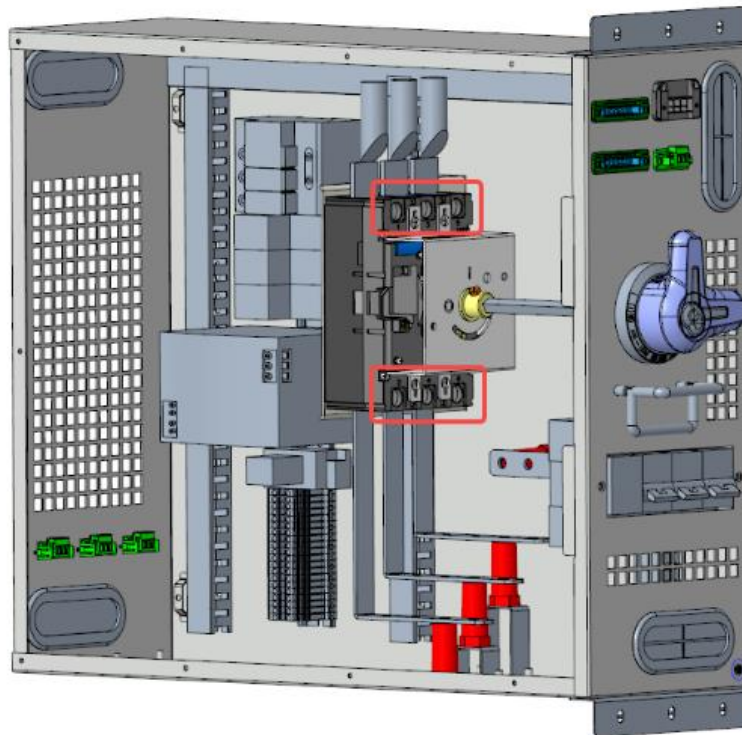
Front protective plate of the circuit breaker assembly
